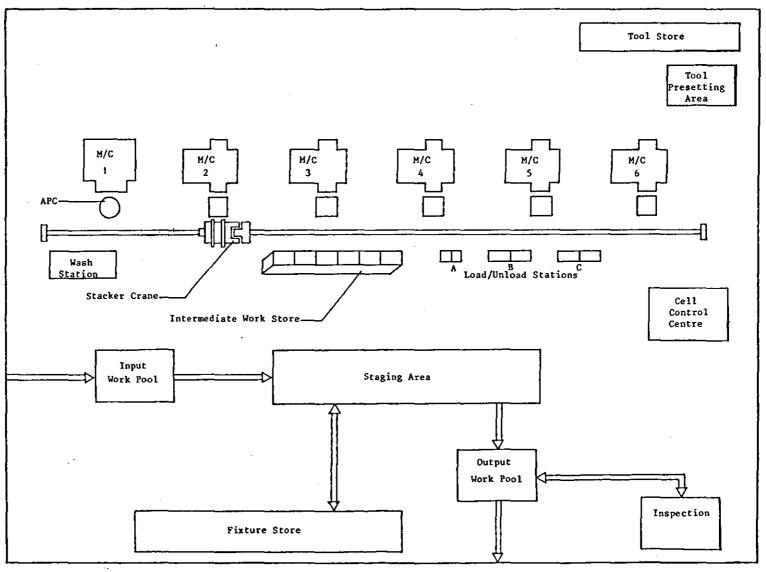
FMS E with CNC Machines, 2 Pallet APC, Stacker Crane
